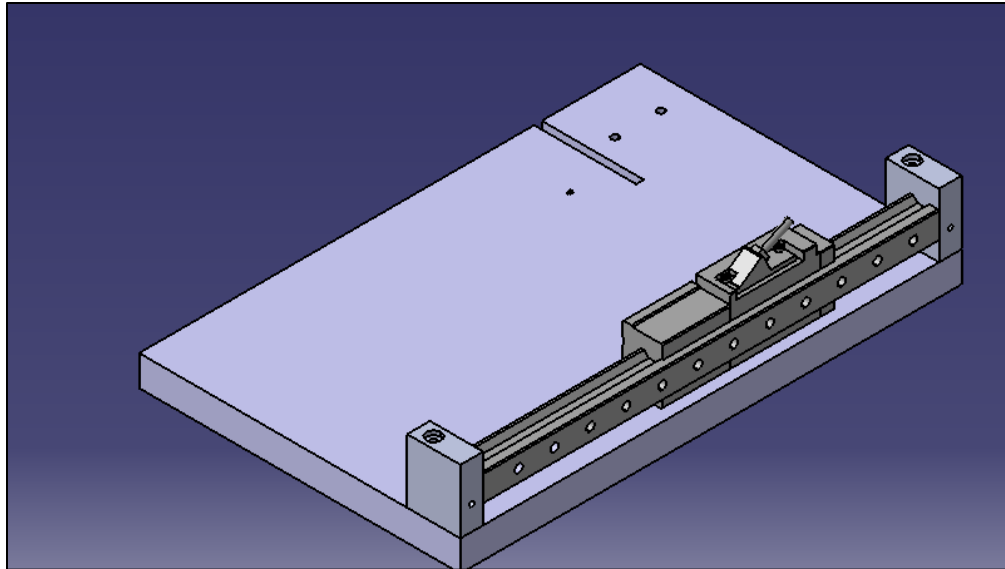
Cutting table and linear rail assembly (rail from [2])
